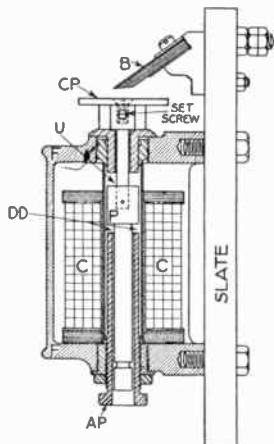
Section of a motor starting solenoid showing the cylindrical case, coil, armature, and contacts.
